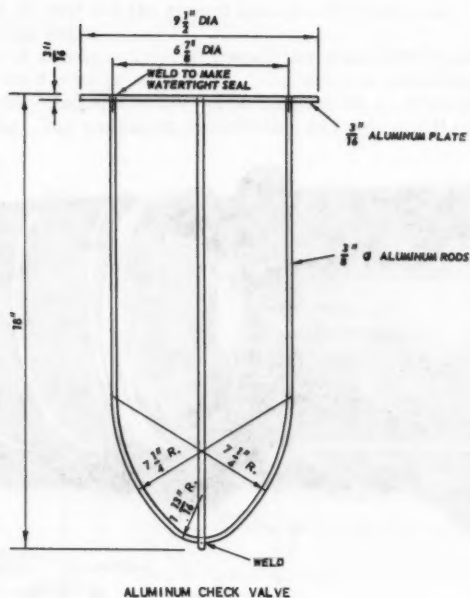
DETAILS OF ALUMINUM CHECK VALVE
